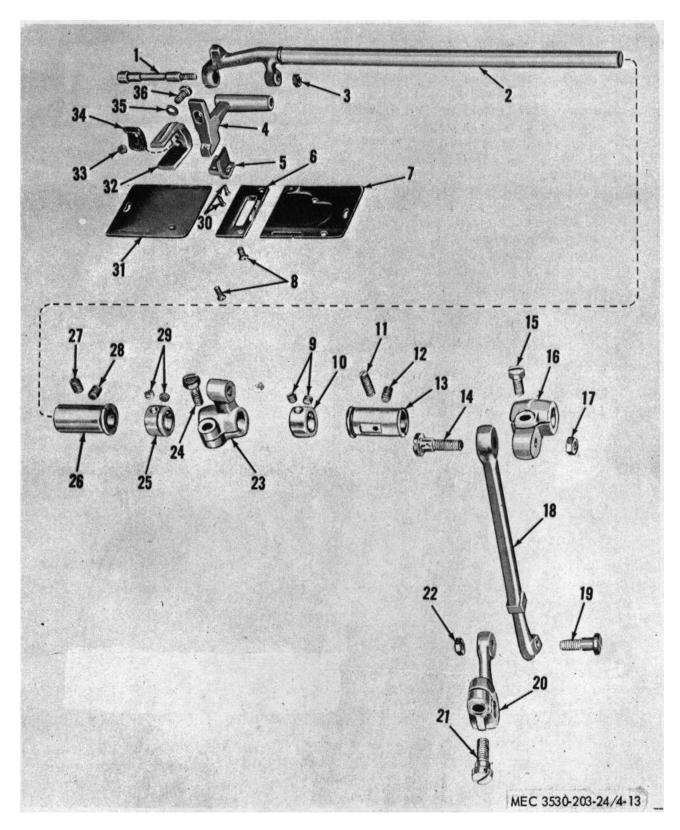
Textile sewing machine feed bar, feed dog, and related parts, disassembled.
